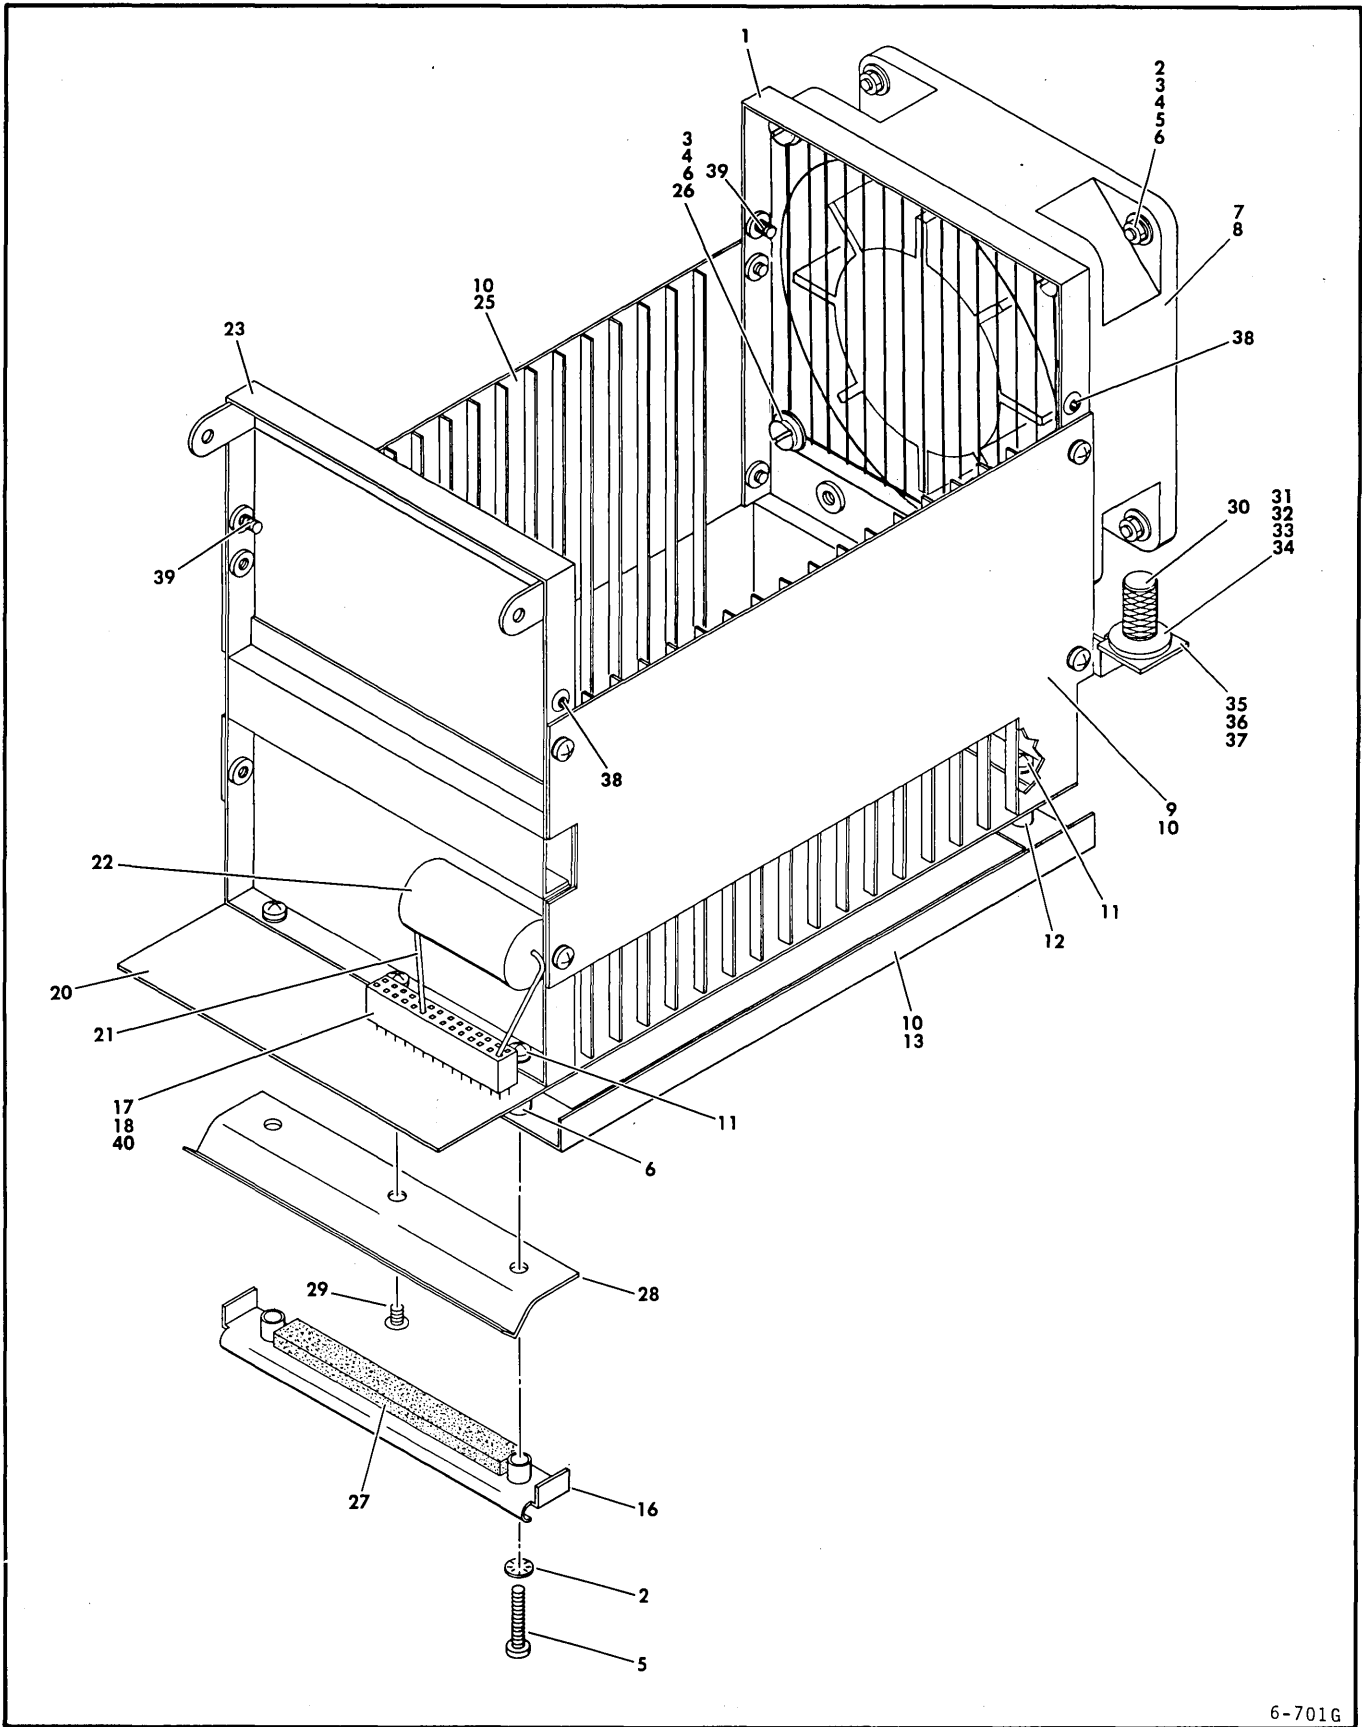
Component Assembly, Type_XKV (Sheet 1 of 2)
